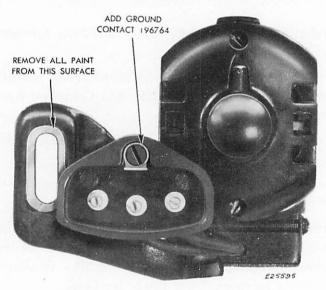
Converting BA3-8 Motor to BA5-8 Motor
